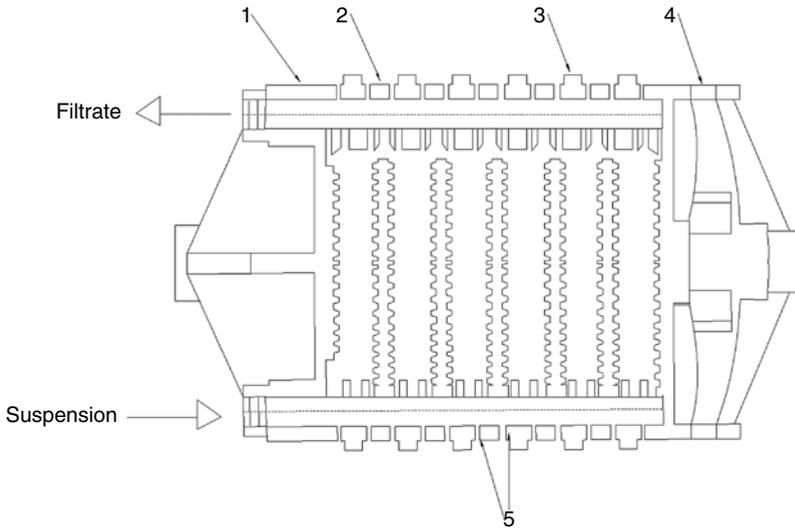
Structure of plate and frame filter press. 1 – Fixed head; 2 – plate; 3 – box; 4 – movable head; 5 – filter cloth.
